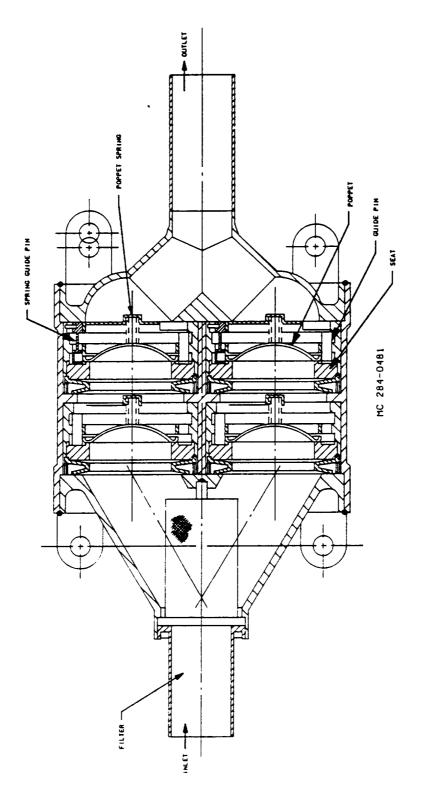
QUAD CHECK VALVE ASSEMBLY
